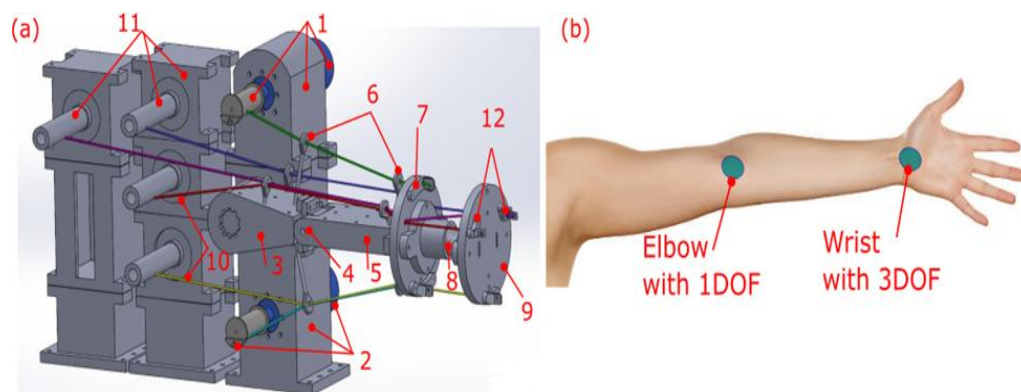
Comparison between the modeled robotic arm and a human arm: a) 3D assembly designed in SolidWorks: 1 - Upper elbow motor assembly that includes an EC Maxon motor, a winding shaft, and a motor bracket; 2 - Lower elbow motor assembly; 3 - Brachium (Upper arm) segment; 4 - Elbow articulation joint; 5 - Antebrachium (Forearm) segment; 6 - Cable anchor points; 7 - Wrist base featuring elbow cable connections; 8 - Wrist spherical joint; 9 - Platform interface; 10 - Actuation cables; 11 - Wrist motor assembly: comprising QB motors, a drive shaft, and a motor housing; 12 - Wrist-specific cable attachments; b) The anatomical human arm used for reference
